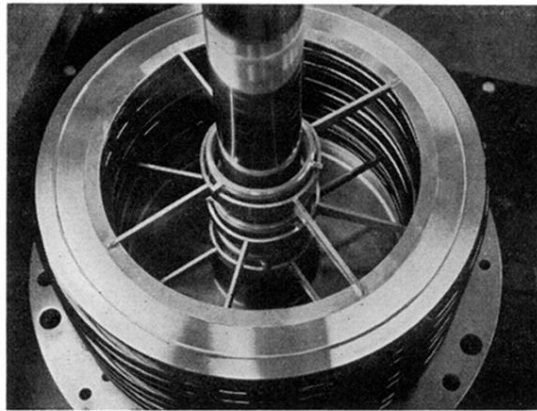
Photograph taken during assembly of a section of the accelerating tube.
